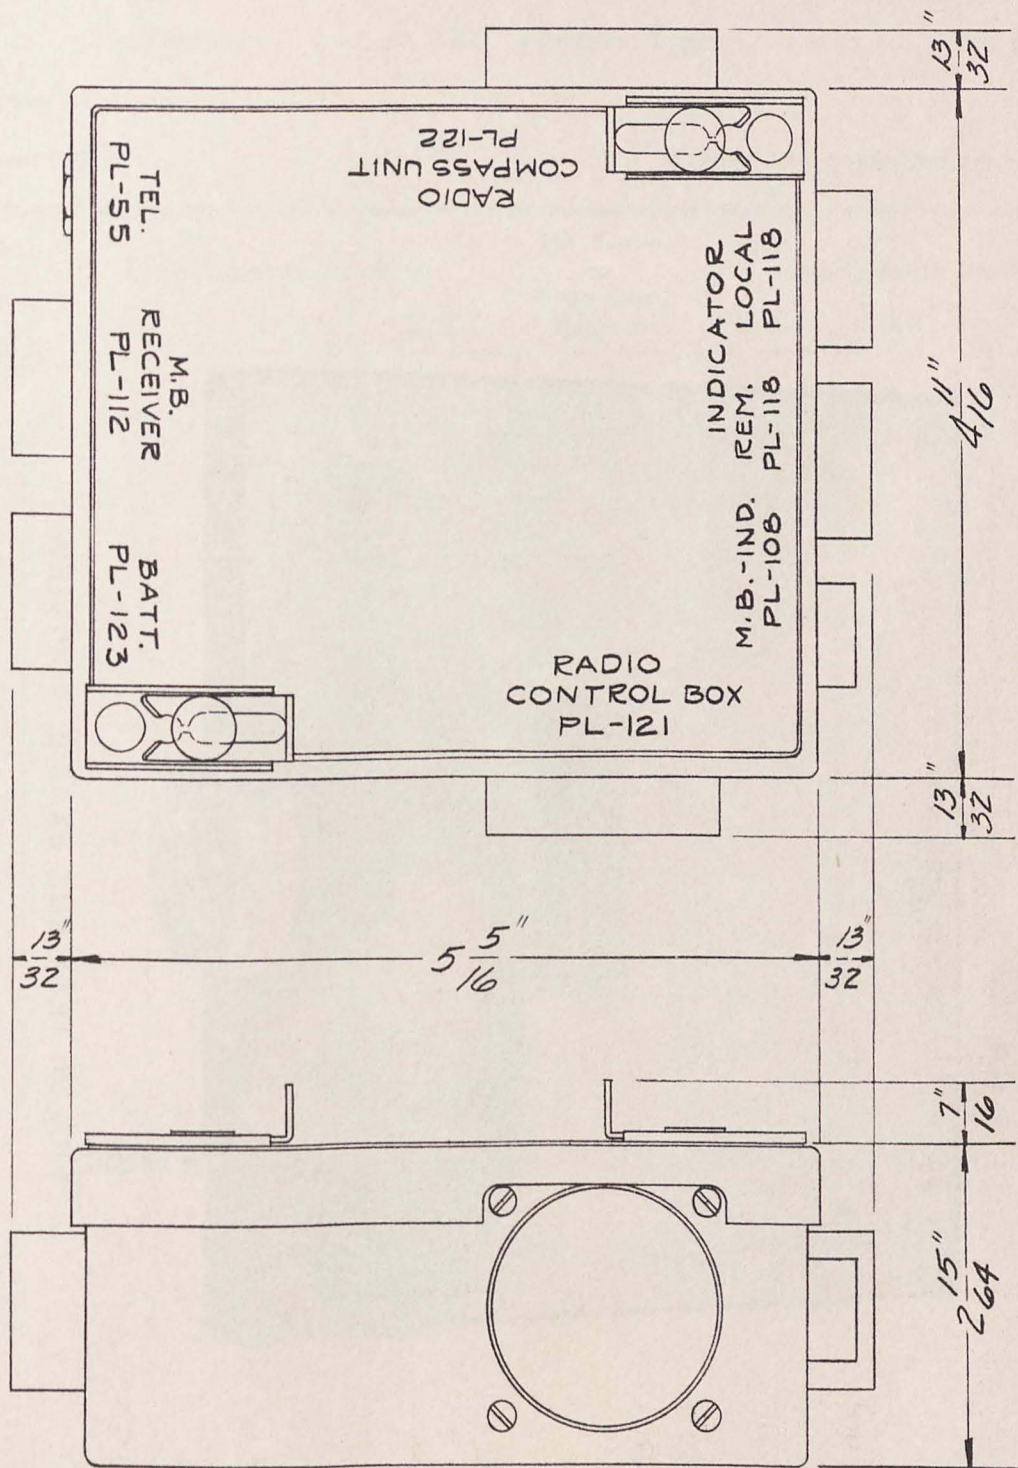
OUTLINE DRAWING—JUNCTION BOX TM-180-B
